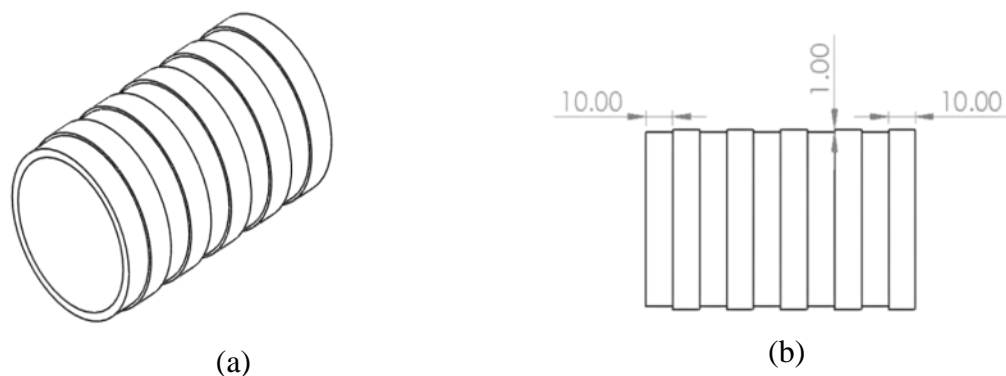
(a) Isometric view of the grooved tube, (b) Grooving dimensions in mm.
